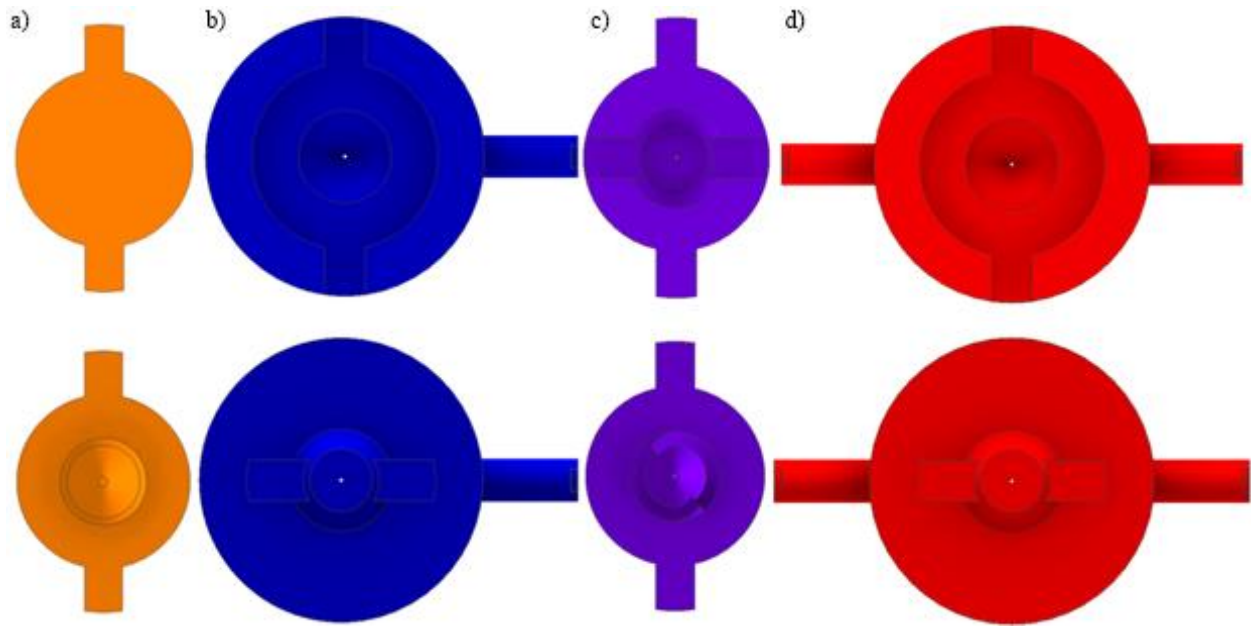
Modular Interface Between Parts a) Plug b) Head 1 c) Core d) Head 2
